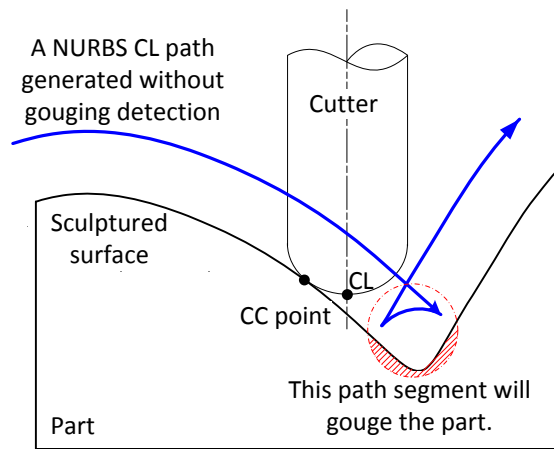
A NURBS CL path with a segment that will cause gouging on the sculptured surface.
